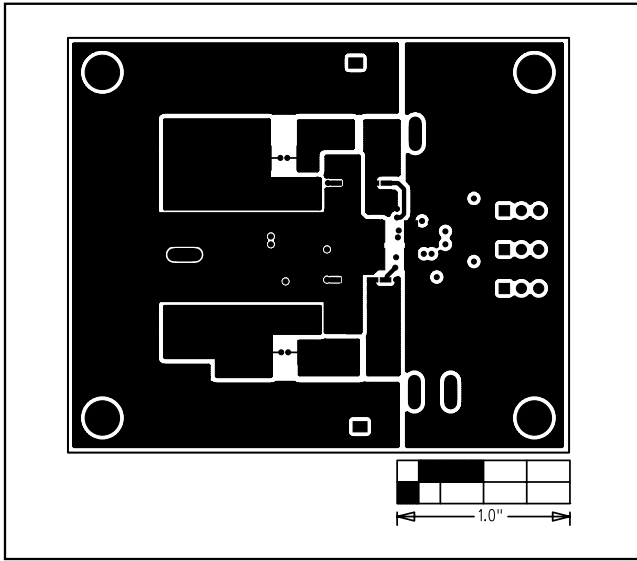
MAX5066 EV Kit PC Board Layout—Solder Side
